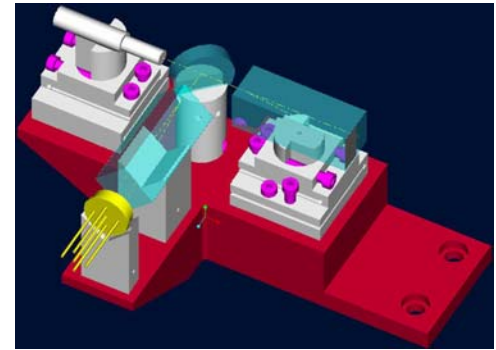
Schematic & CAD Drawing of the Interferometer Beam Path & System Design
